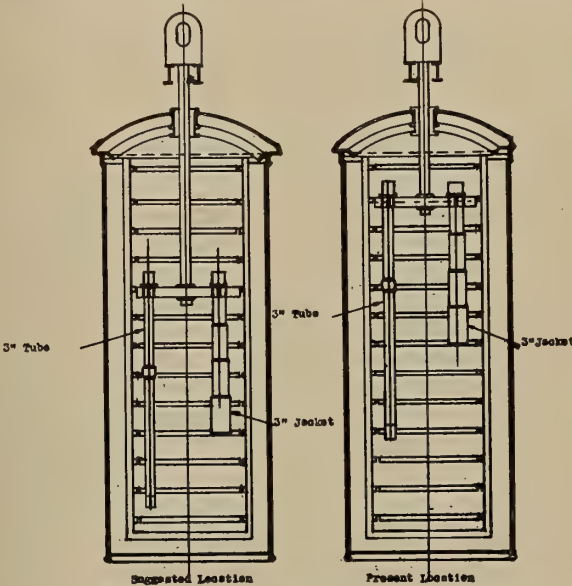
PROPOSED AND PRESENT LOCATION OF 3-IN. JACKETS AND 3-IN. TUBES IN THE FURNACES
